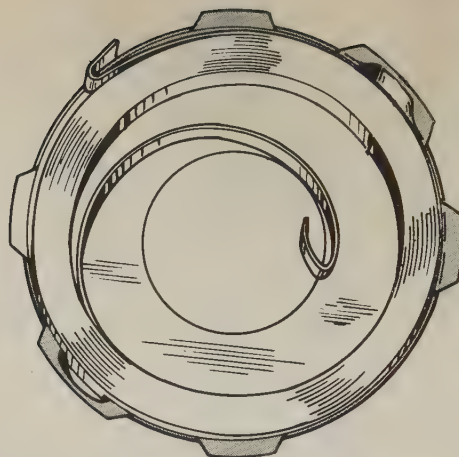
A packaged type of recoil spring. Most replacement recoil springs are enclosed like this in a housing for safe handling.
